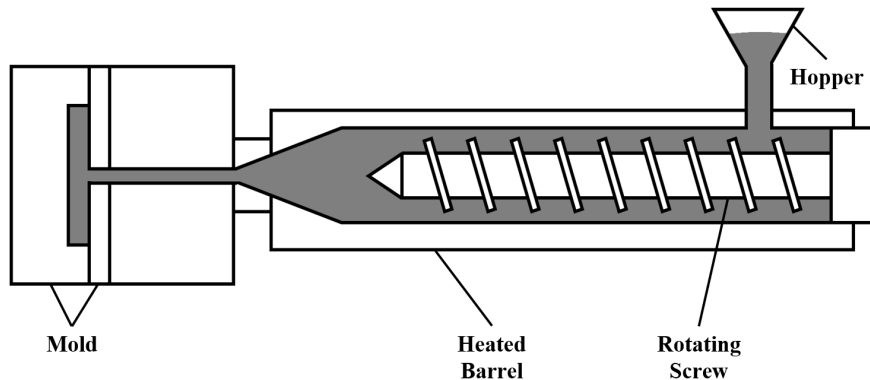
Simple sketch of a reciprocating-screw injection molding machine, based on [18].
